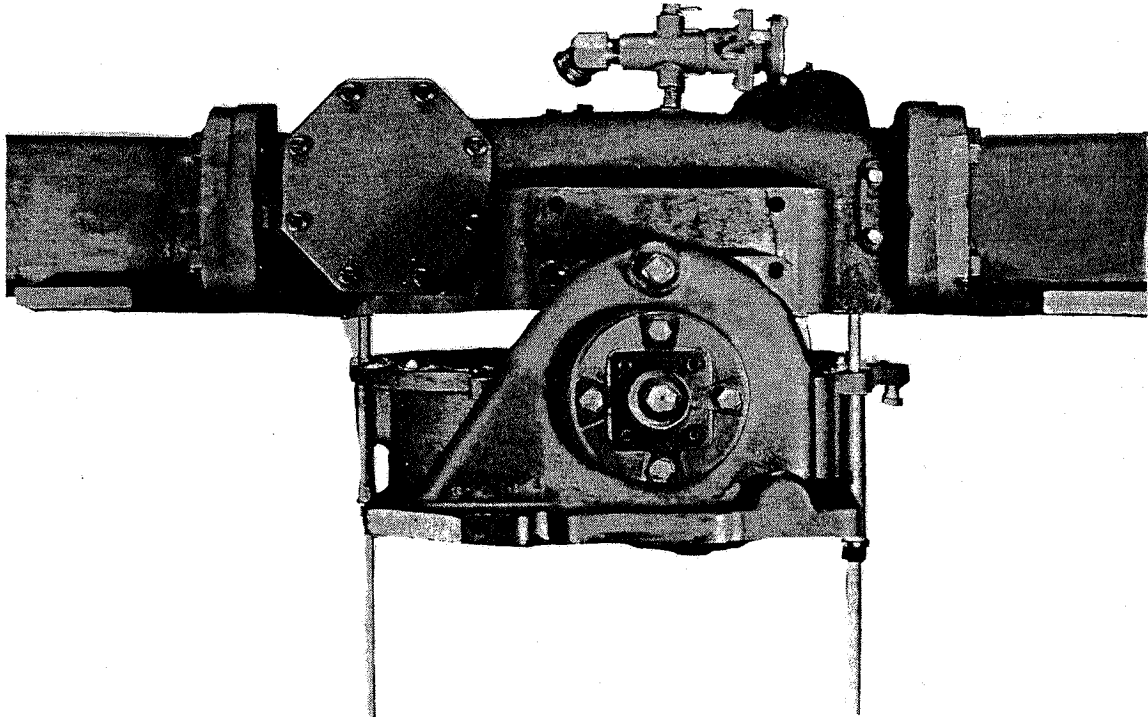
Volute Cover and Impeller Shaft Assembly Suspended from Threaded Rods with W Series Transmission Cap
